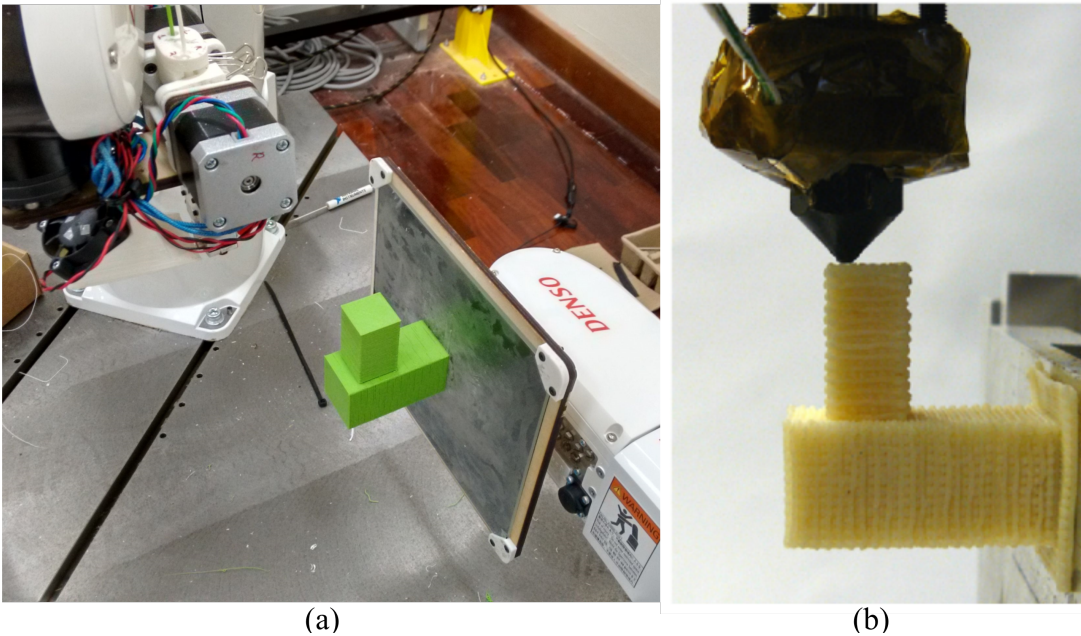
(a) An early proof of concept printed on ARMS, showing a 90° overhang printed without support material by rotating the build plate so that the protruding section could be printed upright. (b) A similar object printed on a 5-axis system by Lee *et al.* [103].
